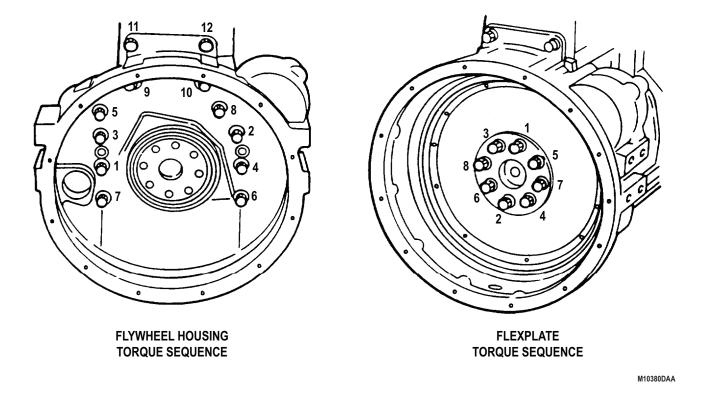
Flexplate and Flywheel Assembly Torque Sequence.
